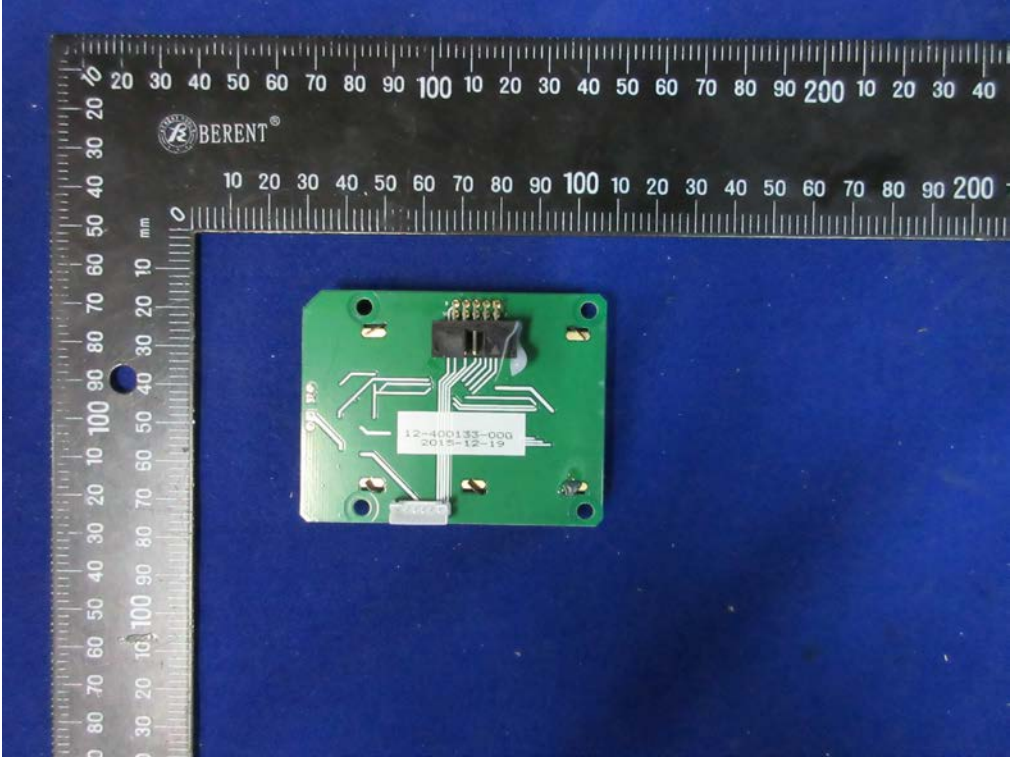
FlinInfini Lite 5kW-48V PCB of LCD display board trace view
